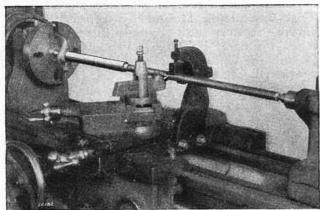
An 11-inch Lathe Turning a Long Shaft of Small Diameter Supported by a Follower Rest
